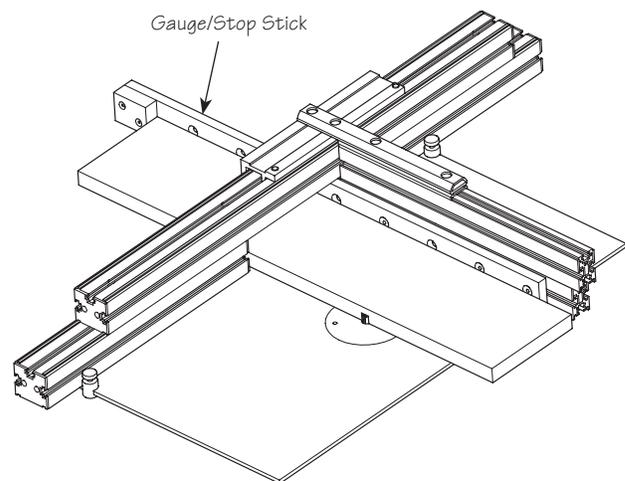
Using a gauge/stop stick to locate the workpiece while cross routing.
